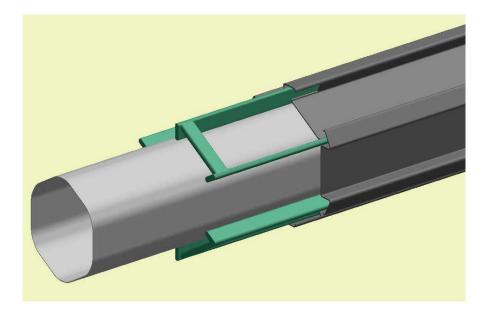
Exploded view of cooling tubes showing the turnaround pipe.
